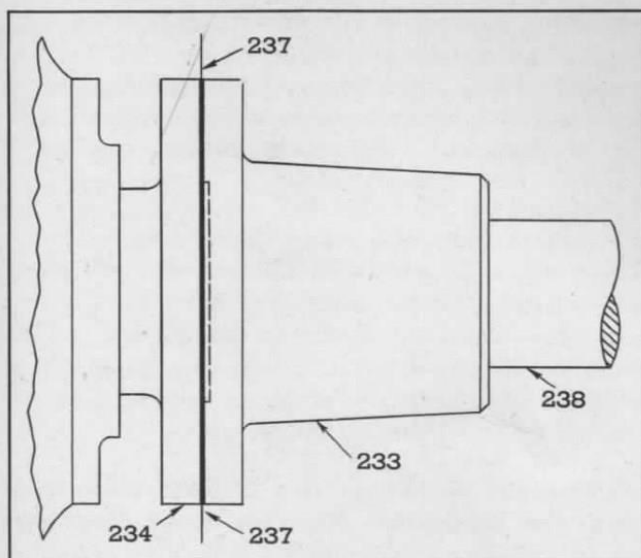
Checking Engine to Propeller Shaft Alignment with Slips of Paper
